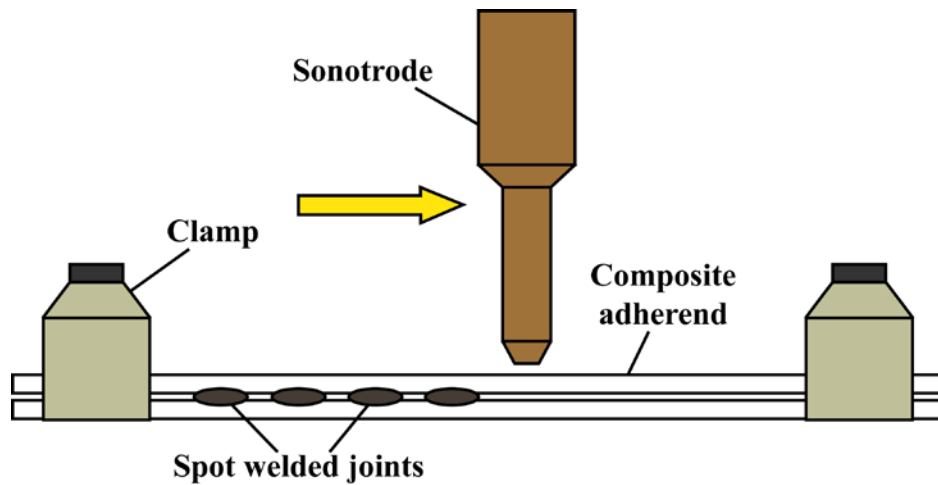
Schematic of the sequential ultrasonic spot welding process. The welds already created introduce new boundary conditions for each new spot to be welded.
